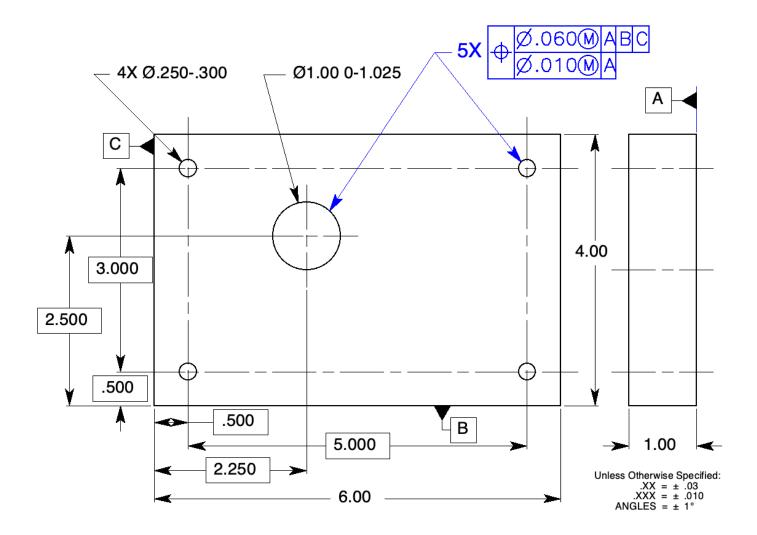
Composite positional tolerancing of holes with different sizes: Prob. 21.
